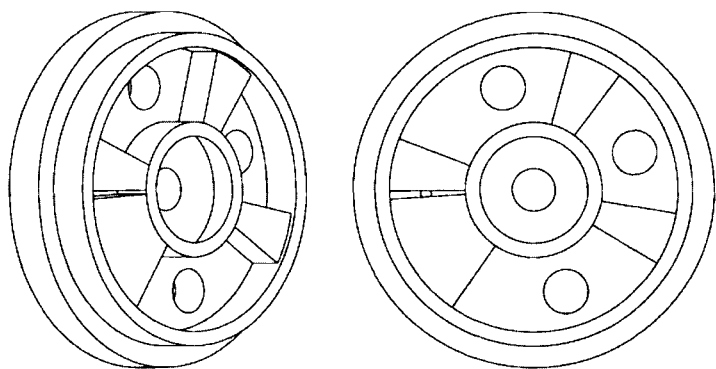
Example of a rotary valve body showing the internal bridges – used on a scraper discharge drum filter
